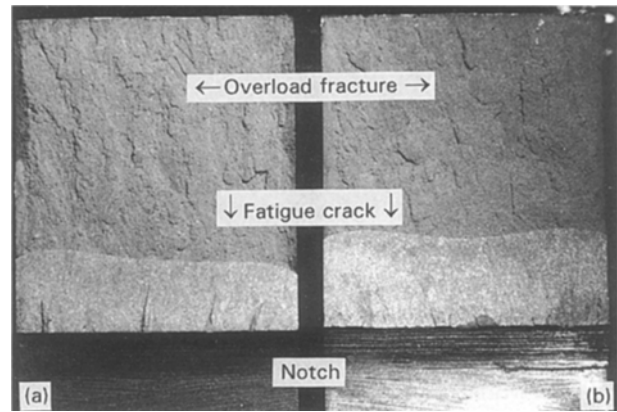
Final crack-tip profile and fracture morphology of the reinforced alloy 8090 after breaking open CT specimens, (a) -6 kN and (b) -8 kN preload; $\times 5.1$.
